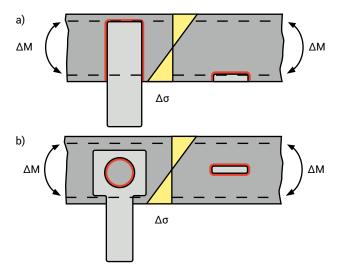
By redesigning the welded joints to be placed in low stress areas the fatigue life will be improved.
